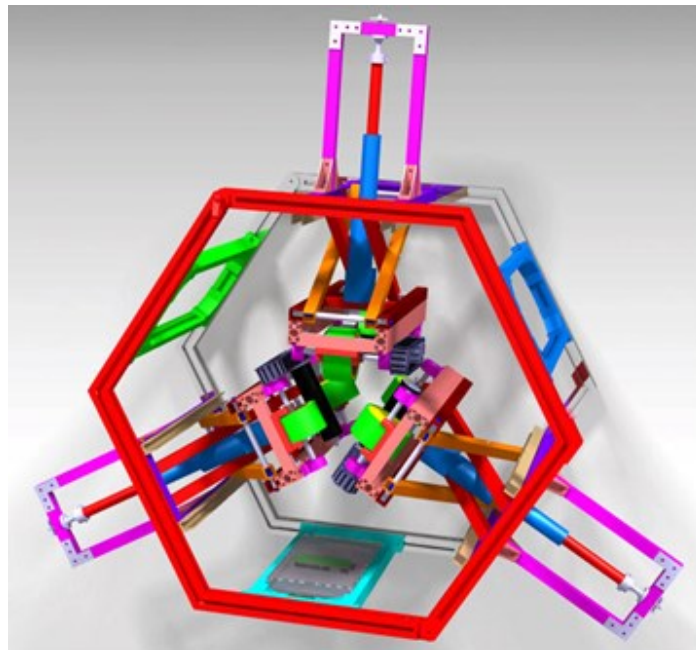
FINAL CHASSIS DESIGN WITH INTERNAL COMPONENTS - RENDERED CAD IMAGE
